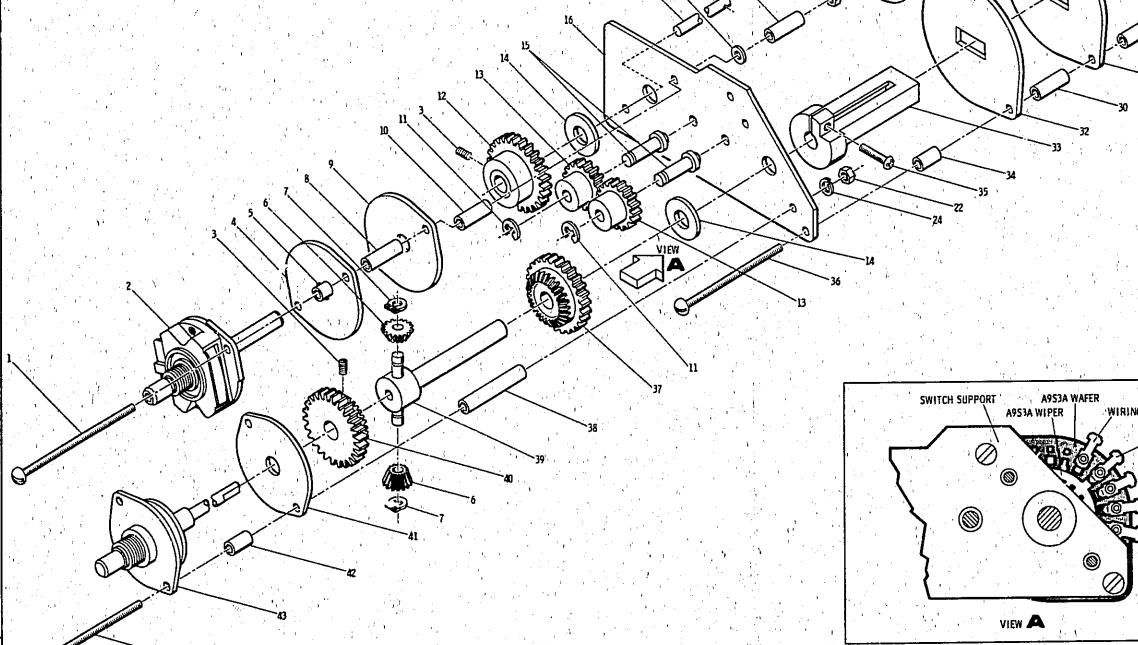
A9 Peak Deviation and Range Switch Assembly Illustrated Parts Breakdown
